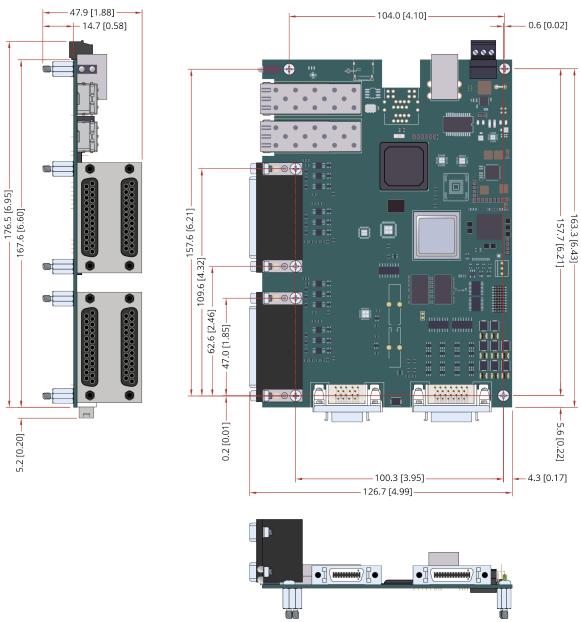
Dimensions [-4P2 (OEM 4-Axis)]
